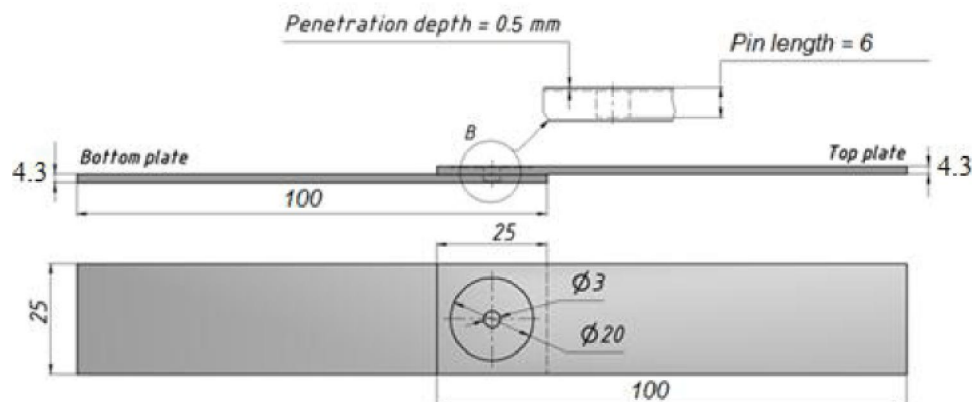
A schematic illustration of the tensile-shear test specimen (Dimensions in mm)
